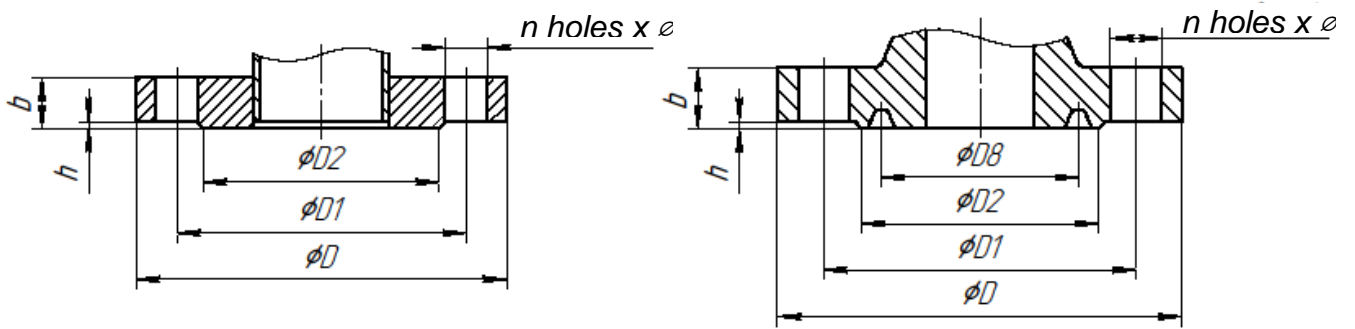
Flange size under GOST 33259-2015 with sealing surfaces of B and J types.
